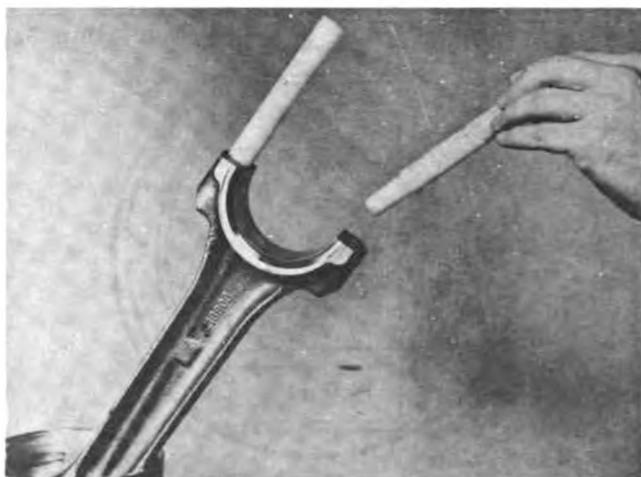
(N114249). Install The Guide Screws Into The Connecting Rod.
